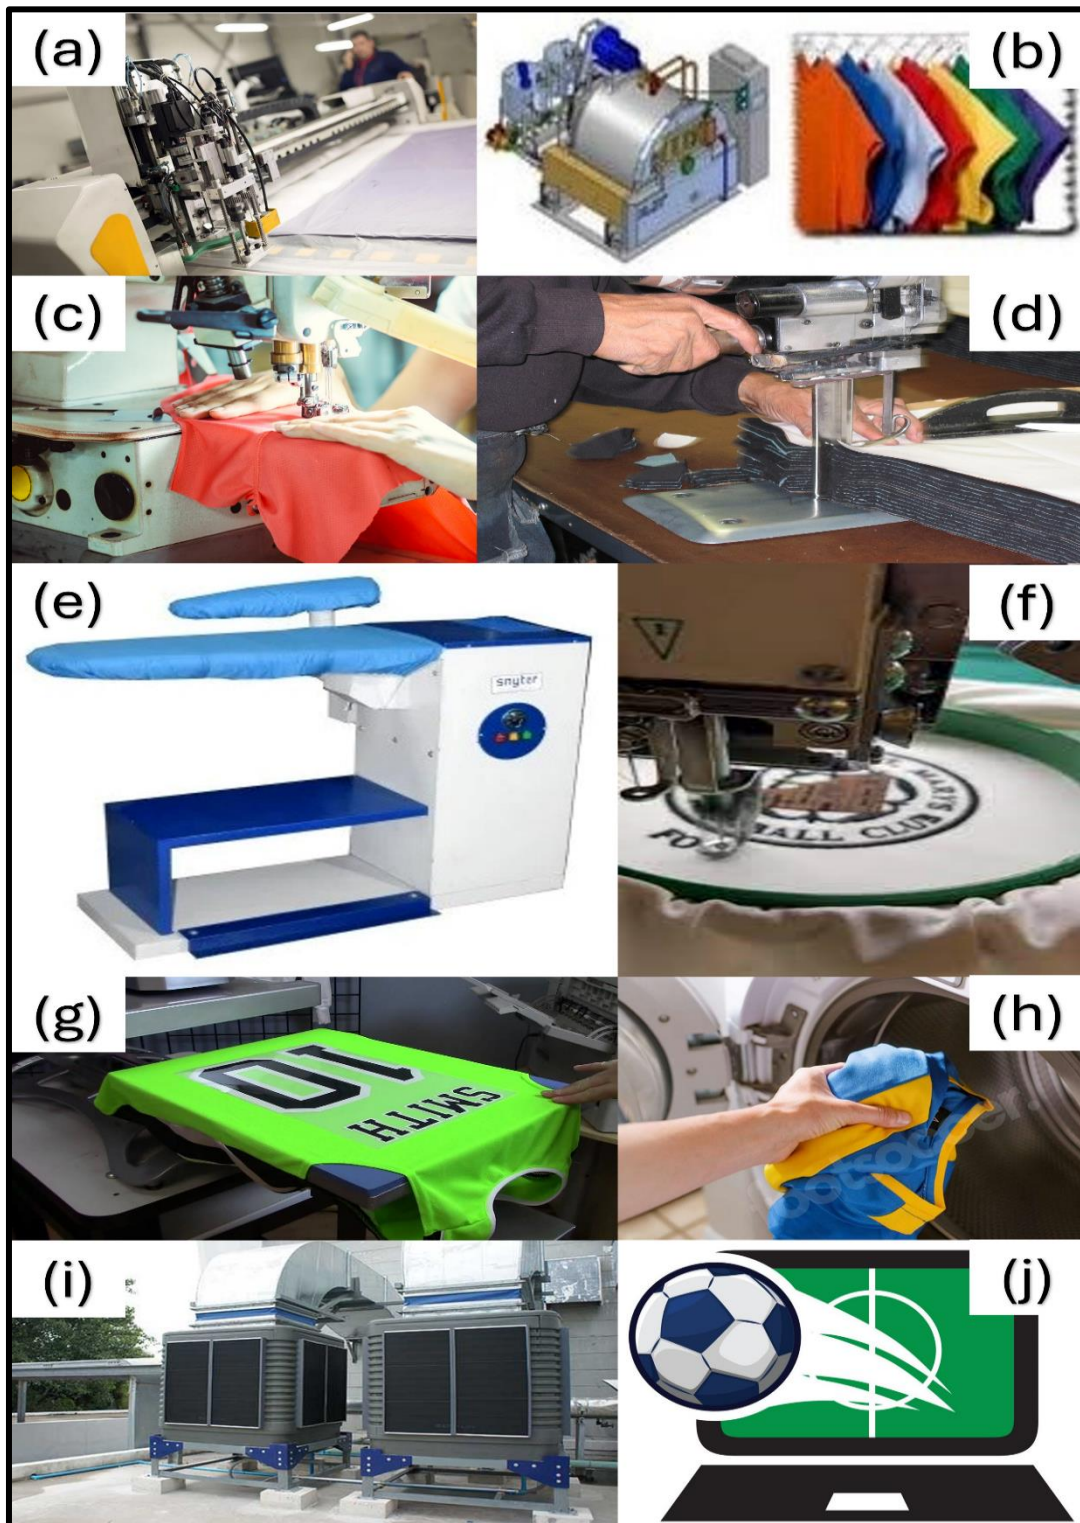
Process in apparel sector 7(a) Fabric manufacturing machines, 7(b) Dyeing and finishing equipment, 7(c) Sewing machines, 7(d) Cutting Machines, 7(e) Pressing and ironing equipment, 7(f) Embroidery machines, 7(g) Printing machines, 7(h) Laundry and dry-cleaning equipment, 7(i) Air conditioning and ventilation systems in factories, and 7(j) Energy-intensive IT systems.
